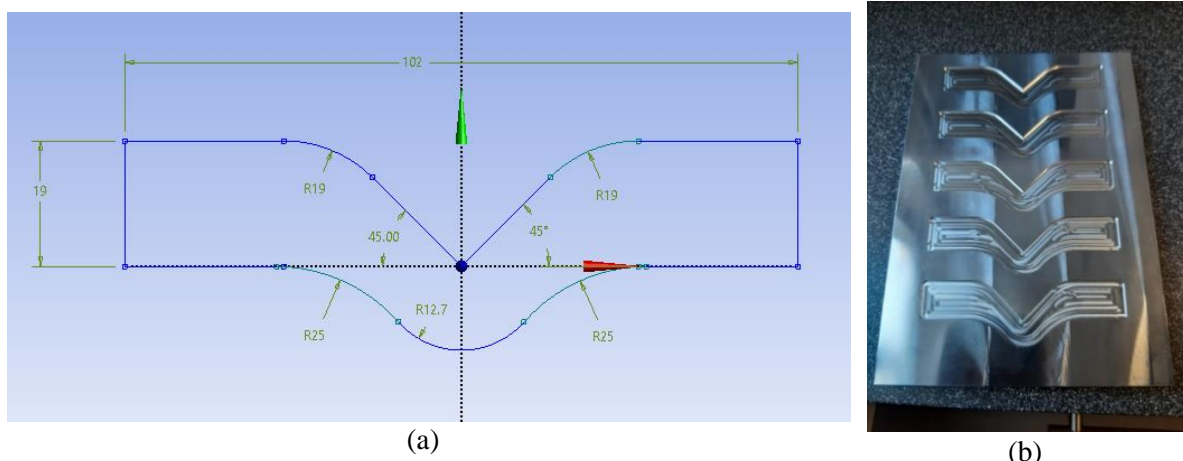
(a) Tearing specimen dimensions, (b) Aluminium tearing mould made from CNC machining.
